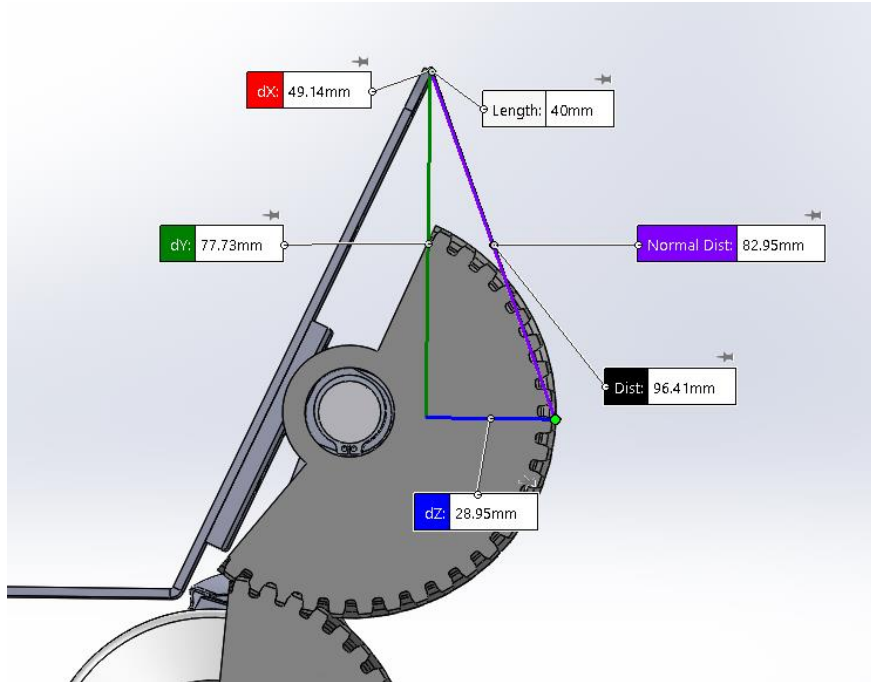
A partial 88 mm gear will protrude 29 mm anteriorly from the top of the lamination plate at the hip joint
